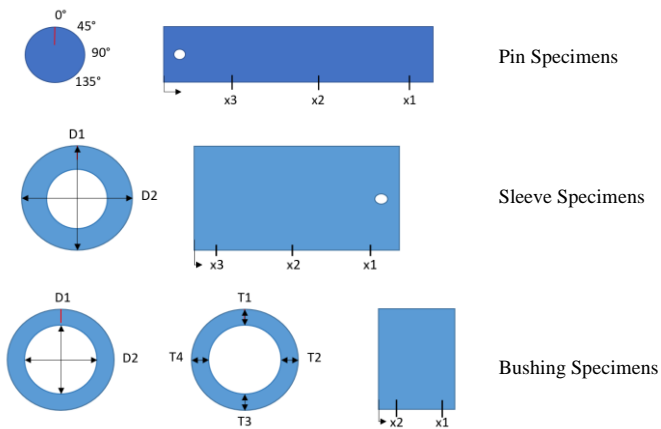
Diagram of dimensional measurement locations for pin, sleeve, and bearing specimens.
